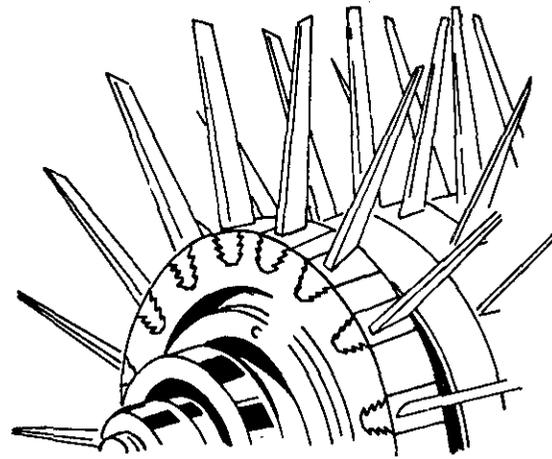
Rotor and stator components of an axial-flow compressor.
